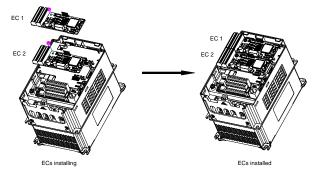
VFD of 5.5 kW or lower with expansion cards installed Expansion card installation process:
